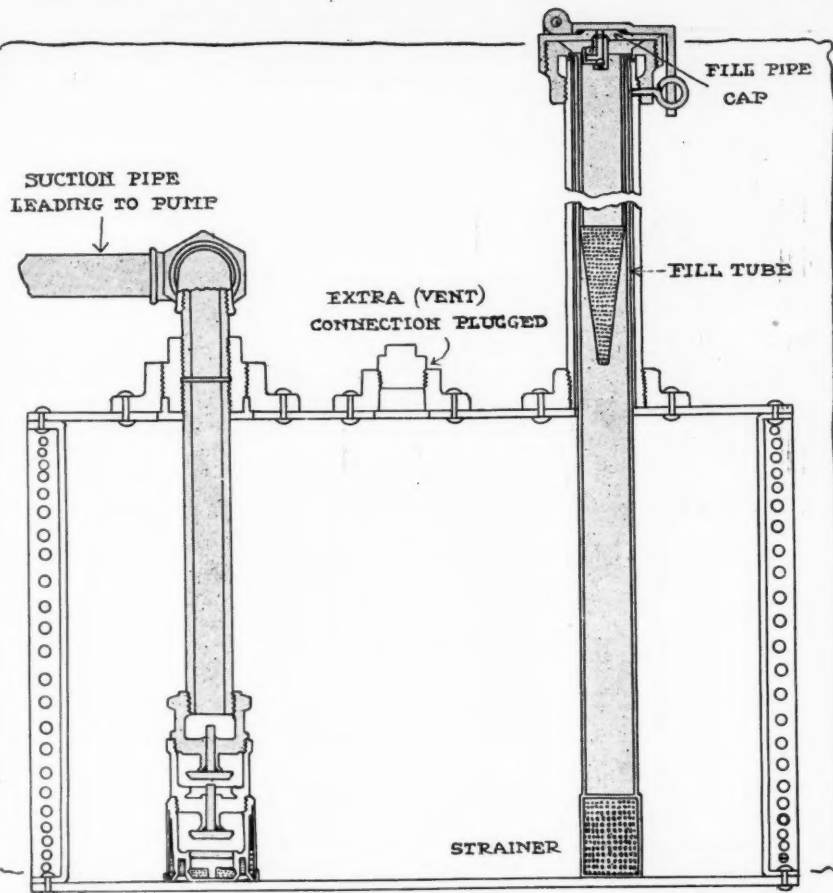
Sectional view, showing the construction of the Bowser cylindrical tank
